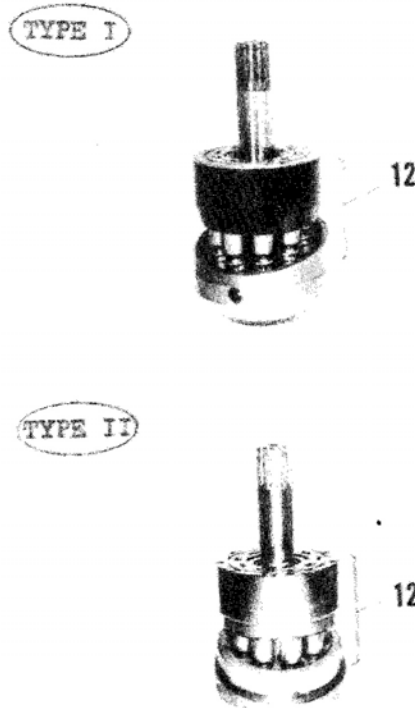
View showing Type I and Type II motor cylinder block assembly (12).
